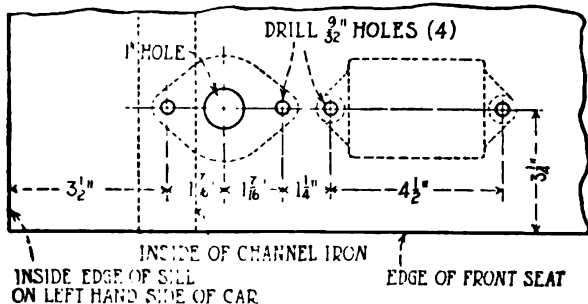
Layout for holes used in mounting starting switch and cutout on the under side of the heel board
